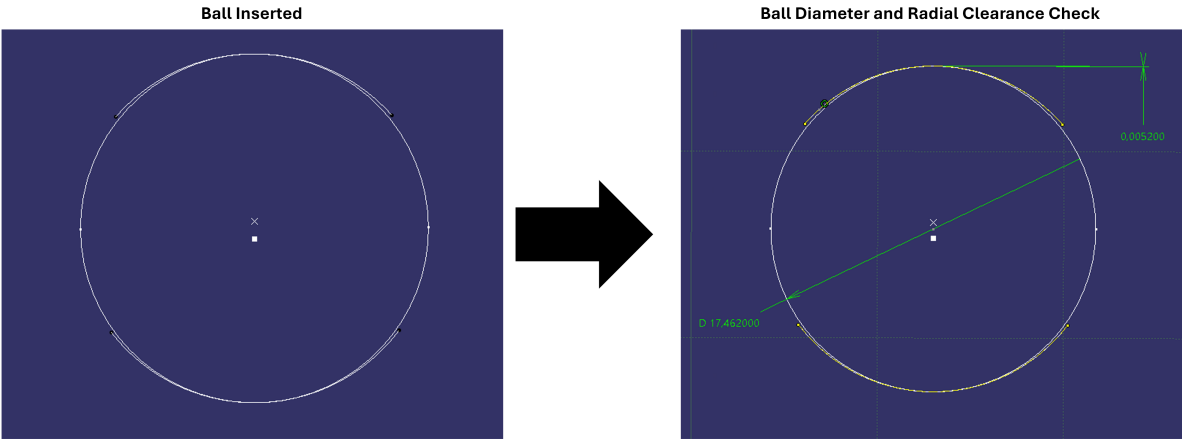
Ball inserted between the splines with contact condition to the inner raceway to verify radial clearance. SKF bearing 6216 shown in this figure, with a ball diameter of 17.462 mm and a radial clearance of 0.00052 mm.
